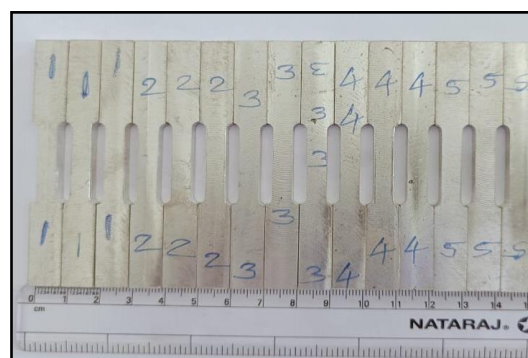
CASTING IMAGE WITH DIMENSION
